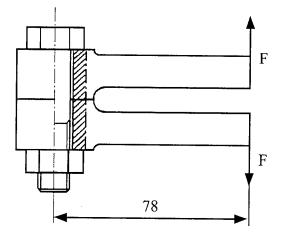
The threaded joint bolt-nut and two fastened plates.
